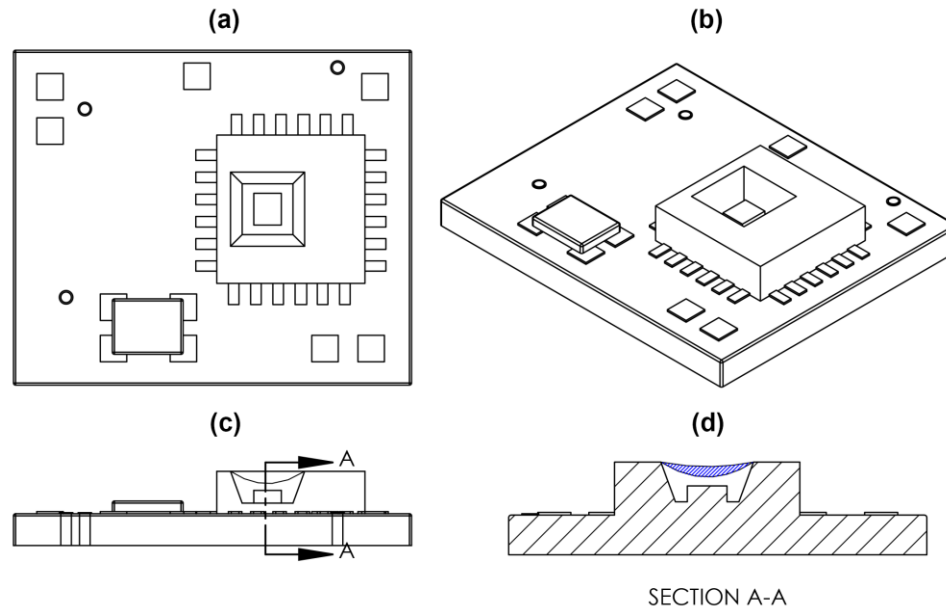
Sketch of FXTH87 on custom PCB. (a) Top view of FXTH87 and PCB. (b) Isometric view of FXTH87 and PCB. (c) Side view of FXTH87 and PCB. The Capacitive transducer membrane is defined by the concave line above the rectangular box, which depicts the location of the capacitive transducer. (d) Cross section view of the FXTH87 and PCB. Blue hatched region depicts the volume filled with Sylgard 184 on the surface of the capacitive transducer membrane.
